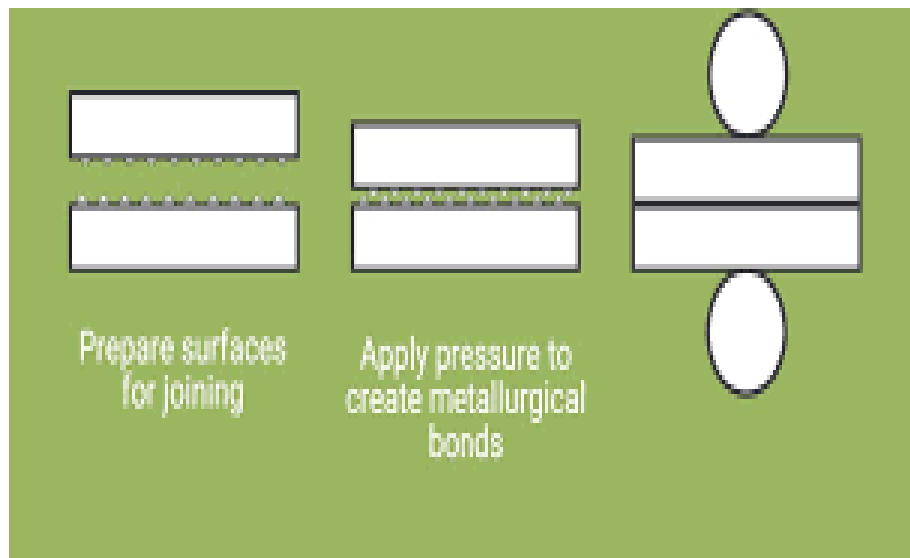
Steps involved in Cold pressure welding process
